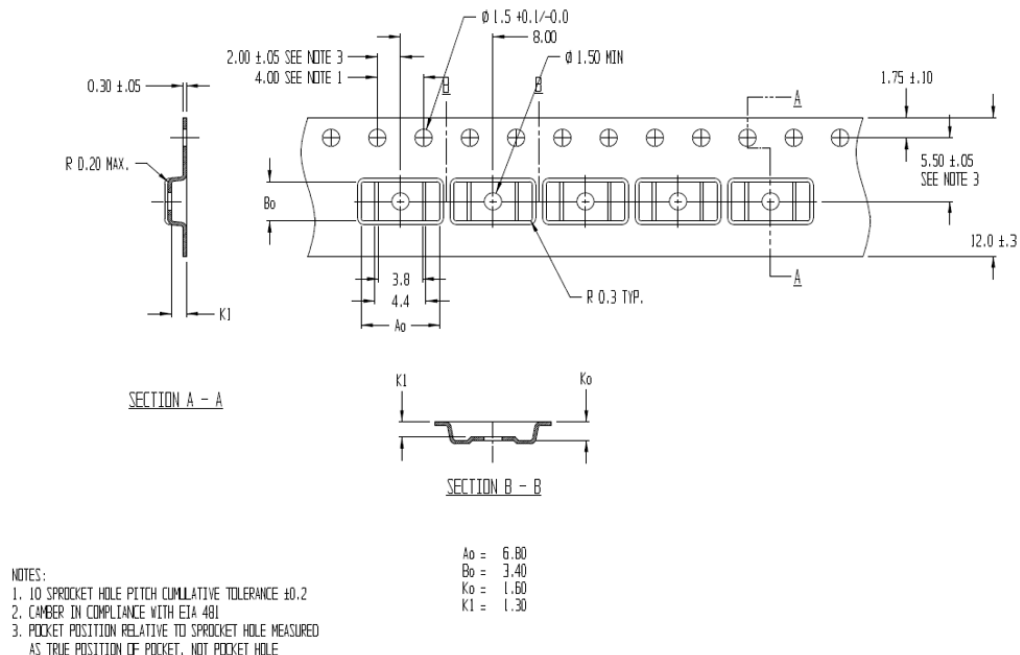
Tape-and-Pocket Drawing for TSSOP-8 Package
